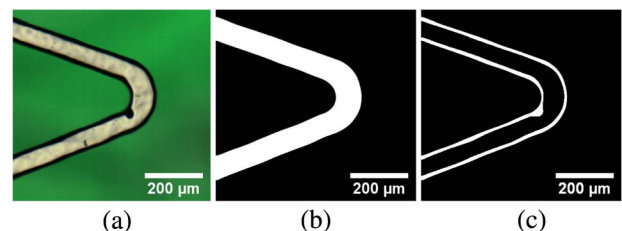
Stent with a crack defect: (a) unrolled image, (b) surface mask, and (c) edge mask.
